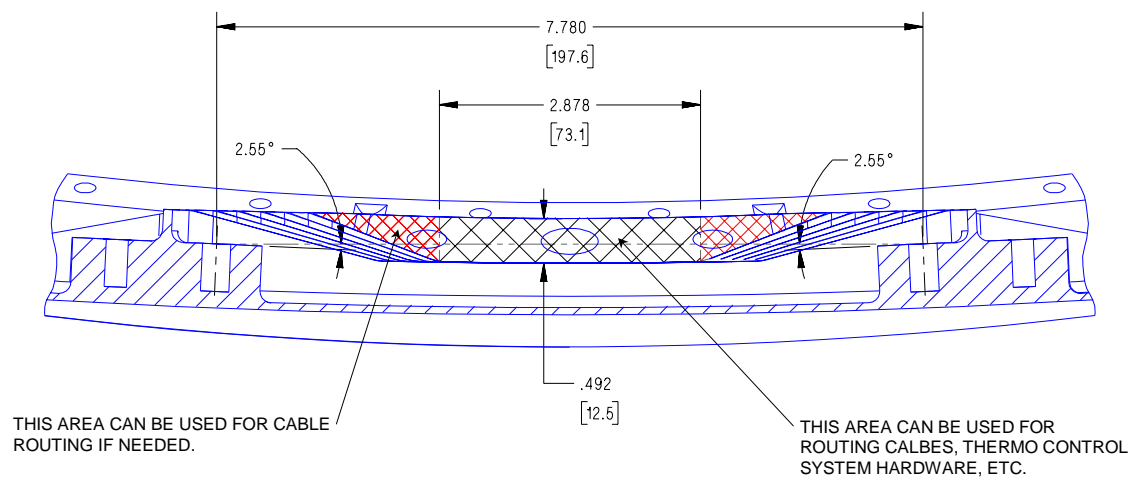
Generic Bolt Hole Pattern on VC Lower Support Ring
